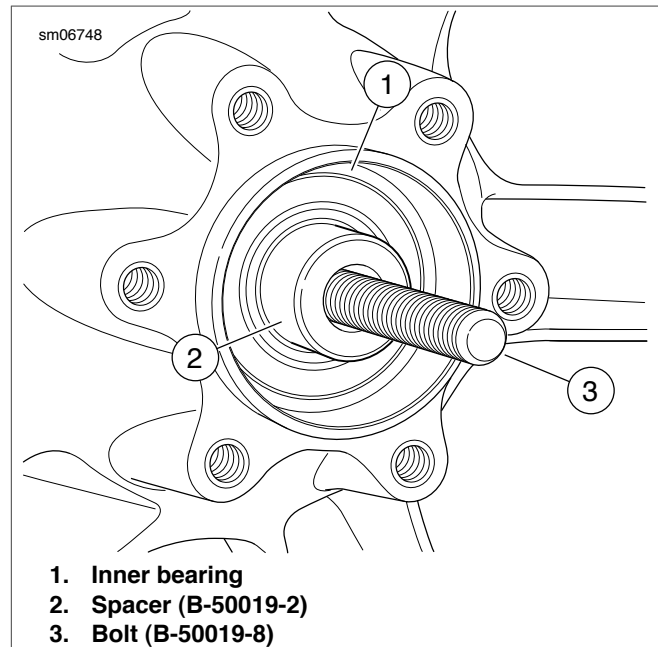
Sprocket Side Inner Bearing, Spacer and Bolt
